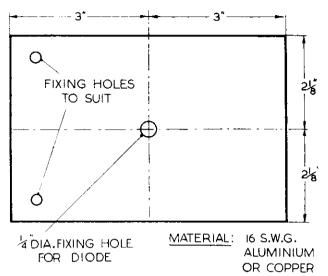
Outline and dimensions of typical heat sink for Zener Diode
